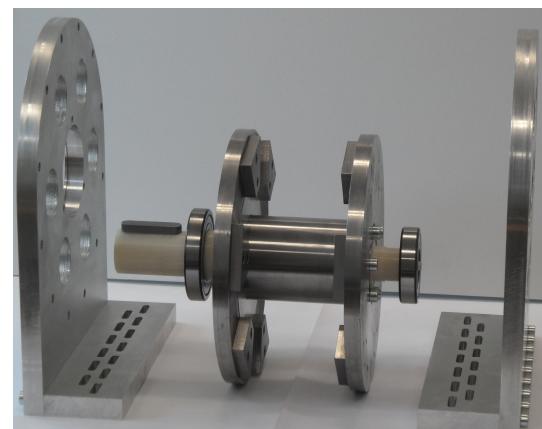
FCAFPM machine's housing and rotor with bearings and square key
